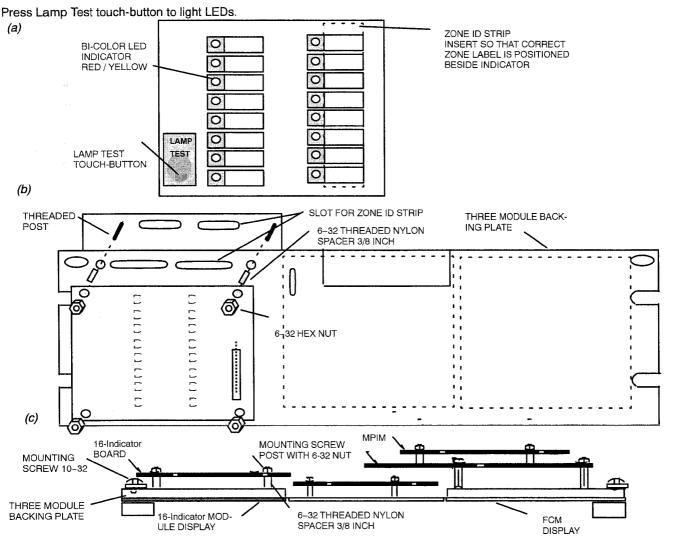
16-Indicator Module. (a) Front view, (b) Back view, typical mounting to mounting plate (c) Side view.
